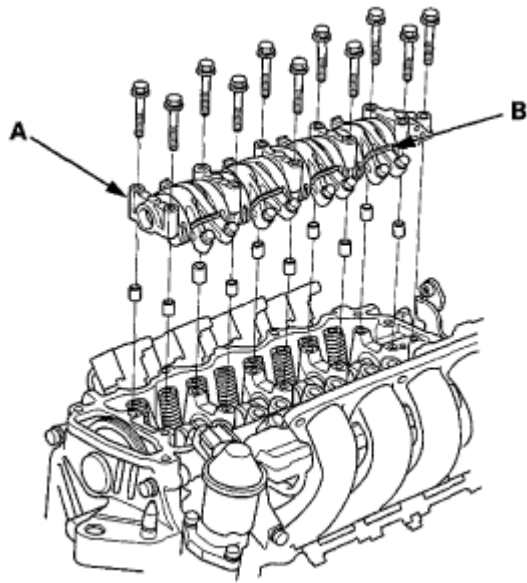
Locating Rocker Arm Assembly And Rubber Bands
